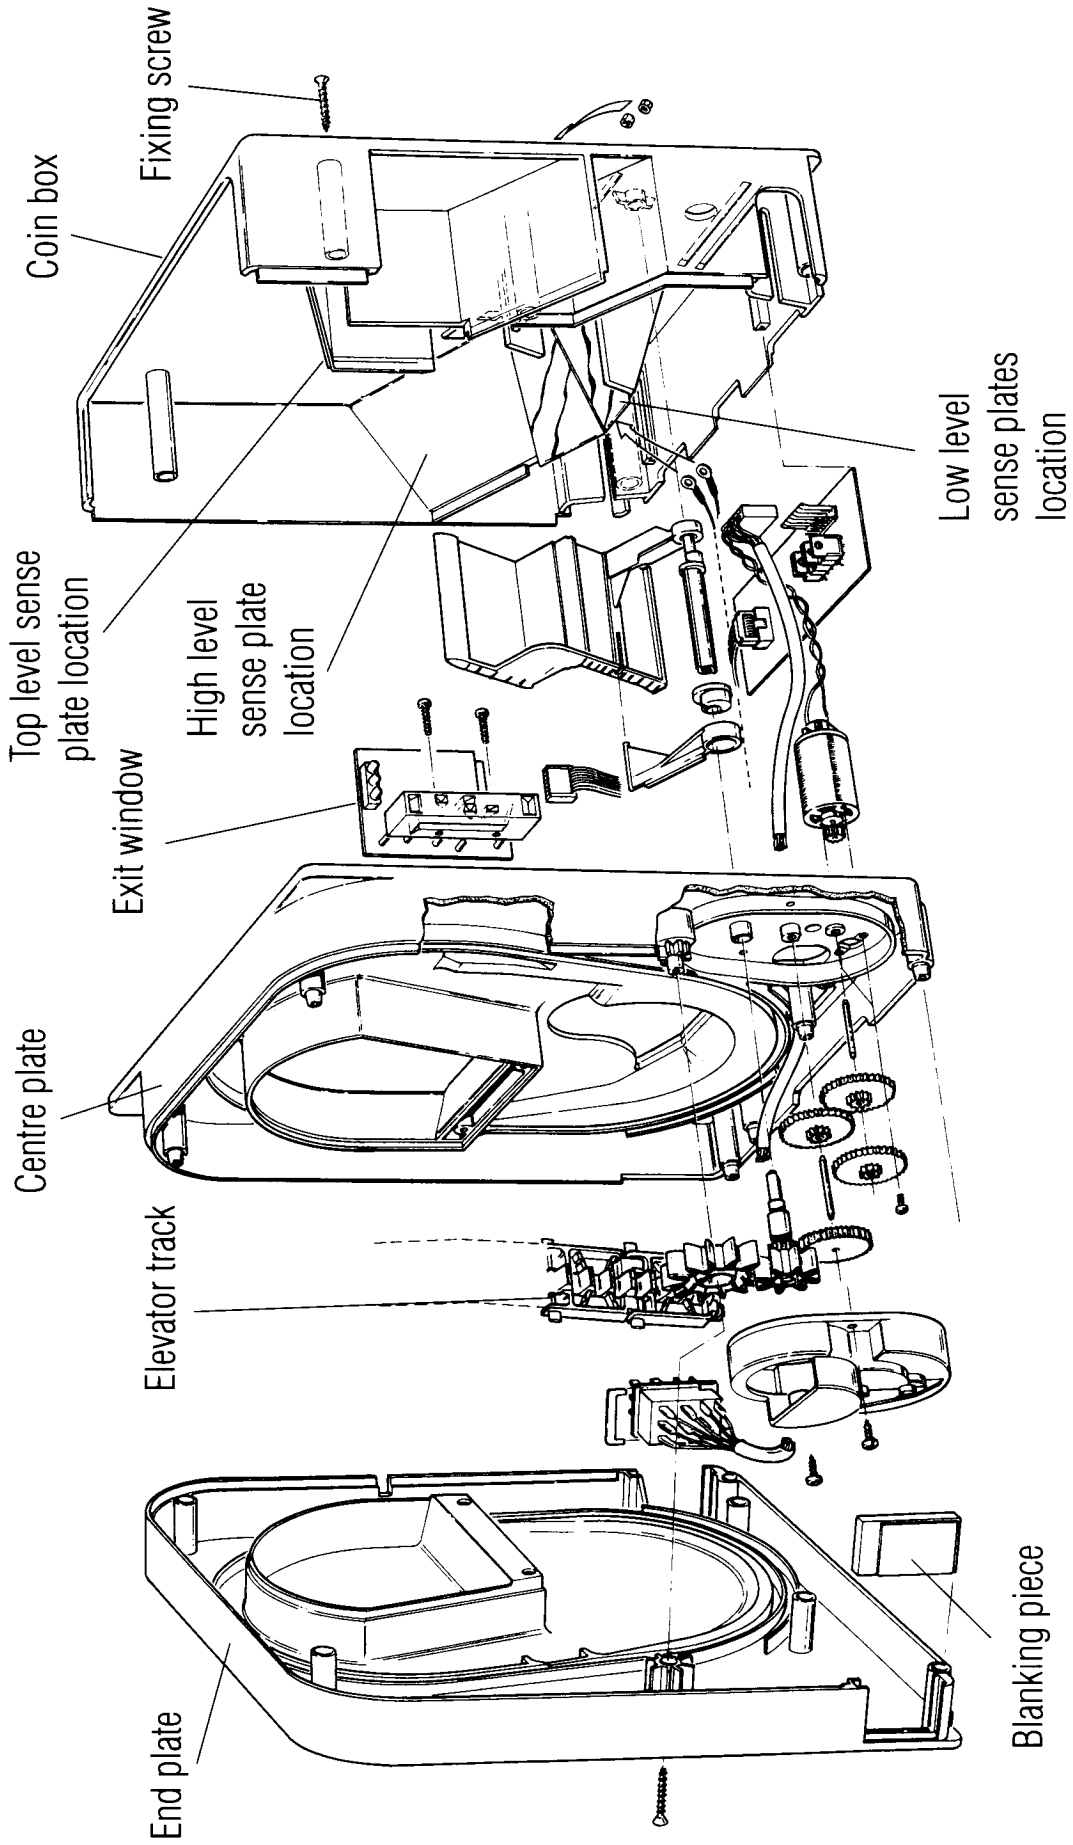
(a): Universal Hopper Mk4 Exploded Diagram
